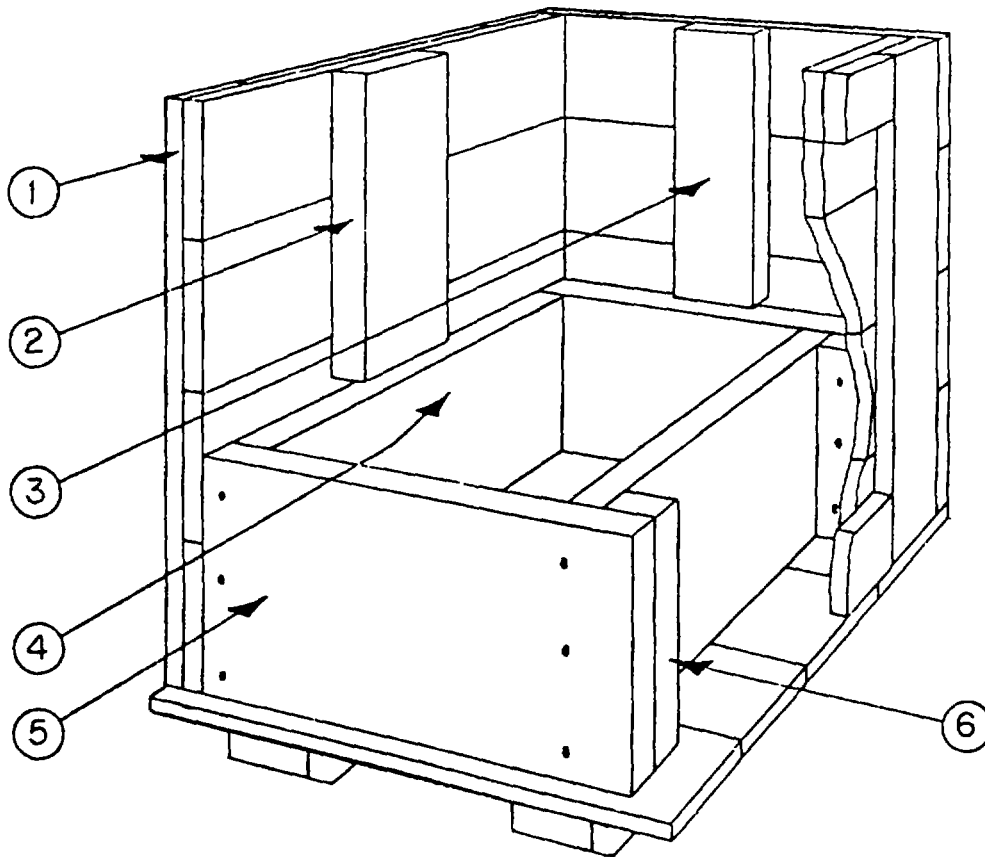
Loading, Blocking, Bracing, and Anchoring, Skidded Base.
